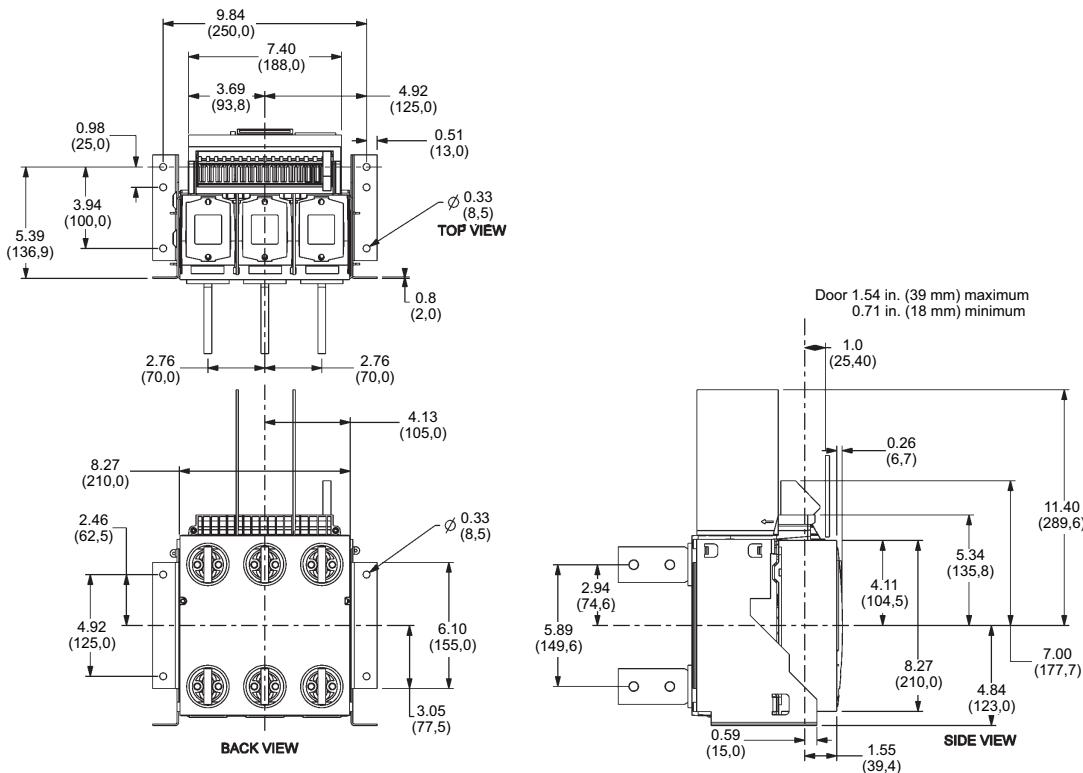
800-1200 A MasterPact NT UL/ANSI Three-Pole Drawout—FCF Front-Connected FlatFigure 32 - 800-1200 A MasterPact NT UL/ANSI Three-Pole Drawout—Door Cutout Dimensions
